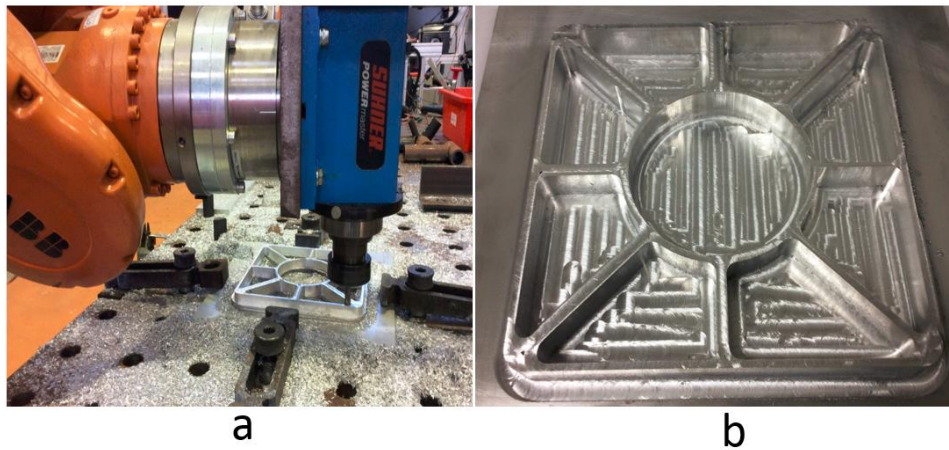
(a) Process of post machining. (b) Final finished part with the desired dimensional accuracy
